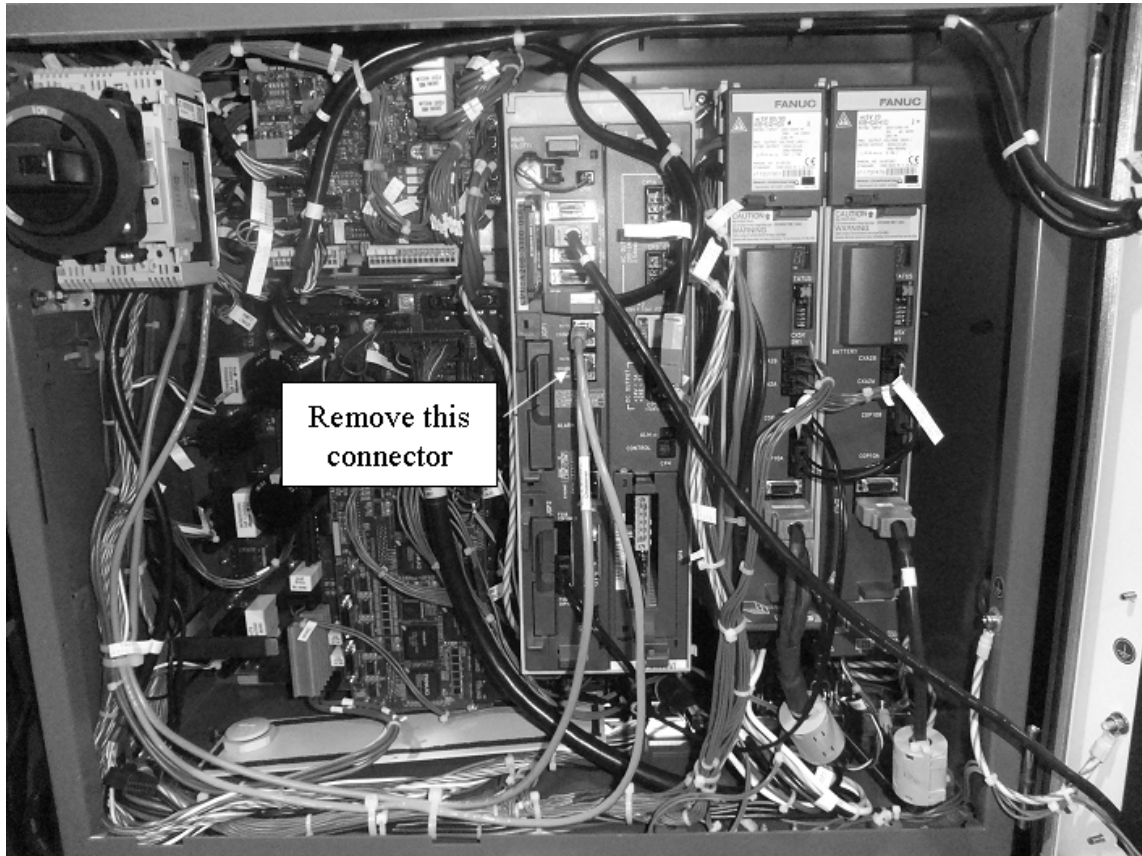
(a) Remove the connector of main board (R-30iB Controller A cabinet)
